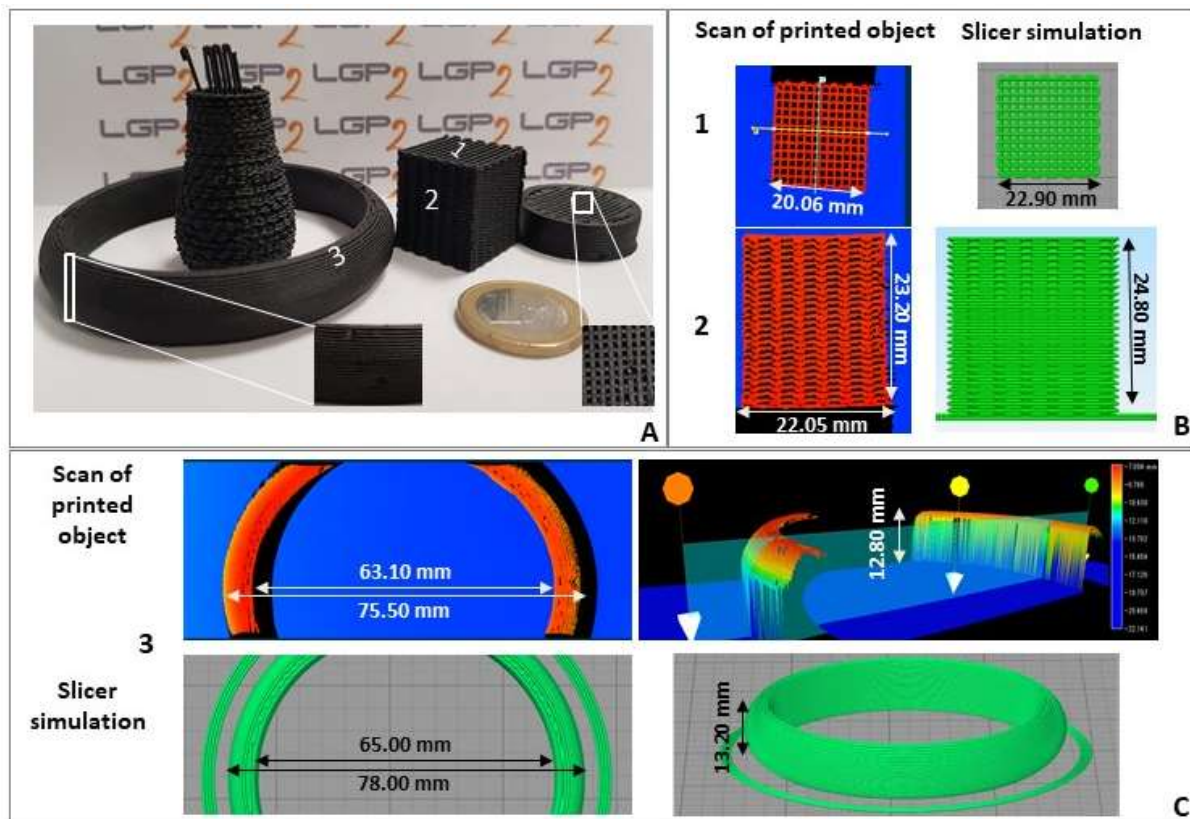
A selection of printed objects with a zoom on the possible defects (A), real scans, and simulation of a top view and lateral view of an unsupported printed cube (B) and a top view and 3D view of a filled printed ring (C).
